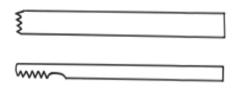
Chasers have a cutting section that is very similar to an inside section of a threading die. They are made by pressing the cutting section of the chaser against a rotating mandrel that is similar to a large tap of the given thread and pitch. The outside chaser (top) has the cutting section on the end of the tool and the inside chaser (bottom) has the cutting section on the side of the end of the tool. Normal wooden handles are generally added to these tools.
